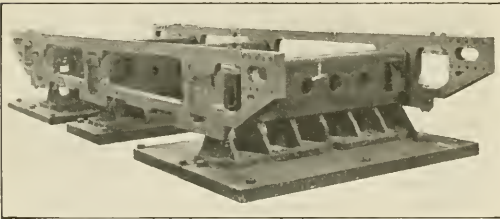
Jig for the Accurate Assembly of Main Frames, Cross-Ties and Bumpers
